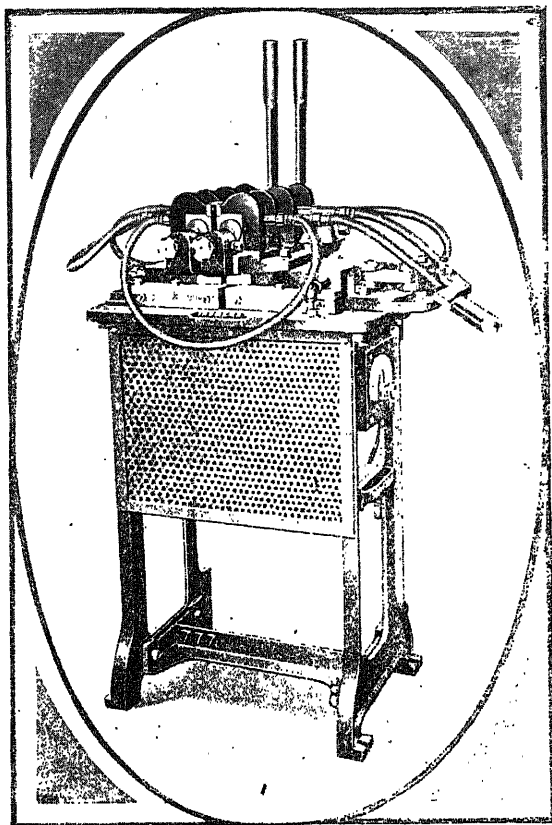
Thomson 10-A6 Butt-Welding Machine.
